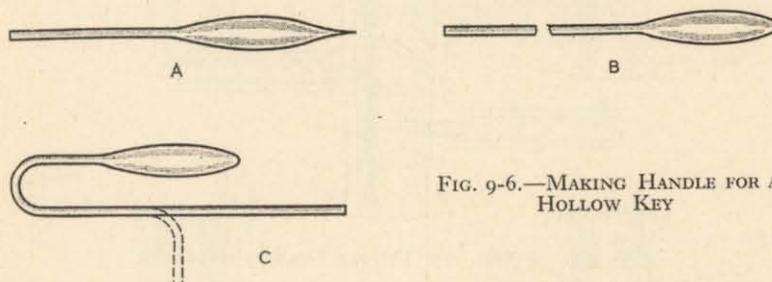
MAKING HANDLE FOR A HOLLOW KEY
